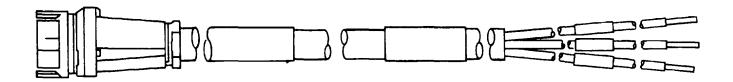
Cable Assembly CX-2043/U, drawing number SC-D-93578.
